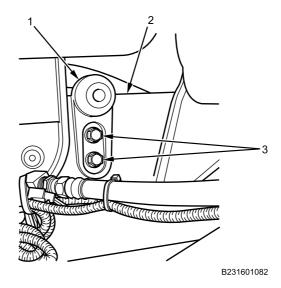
Front Shock Absorber Upper Mounting Bracket Removal.
